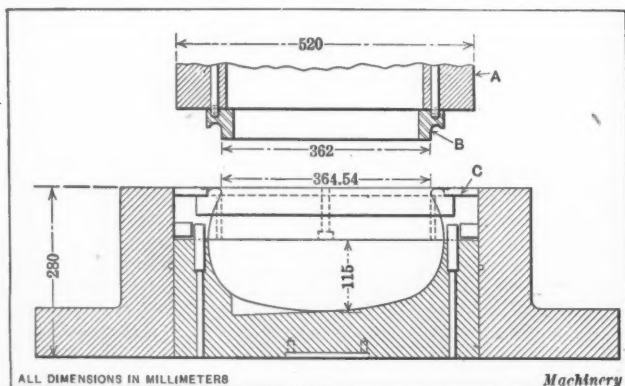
Punch and Die used in curling the Top of the Flange and trimming its Edge
